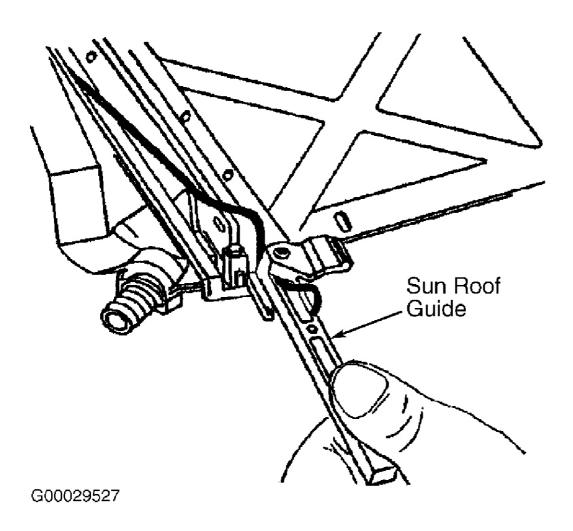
Removing & Installing Sun Roof Guide Courtesy of GENERAL MOTORS CORP.
